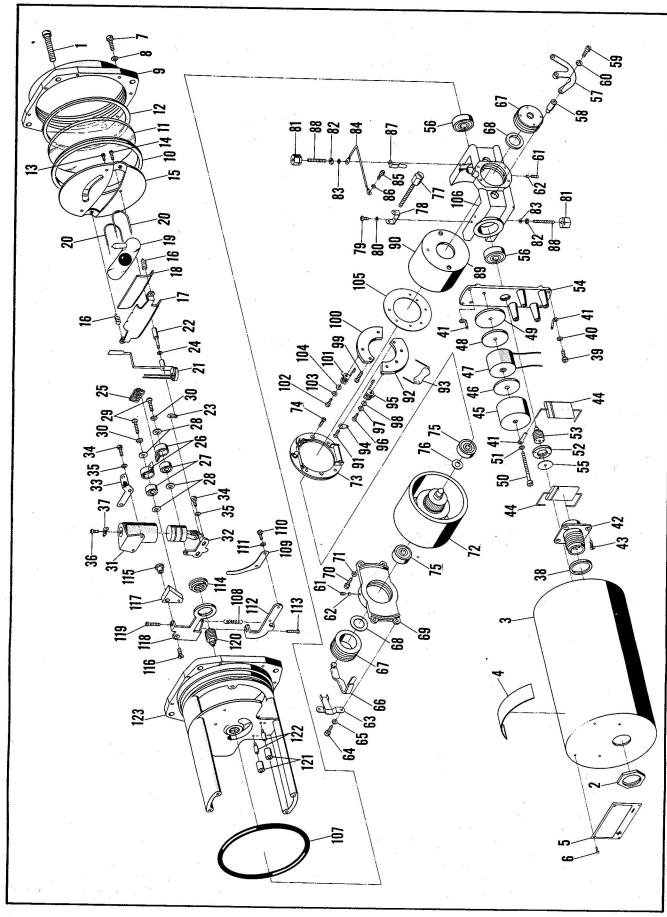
Bank and Turn Indicator Assembly, Model B4
